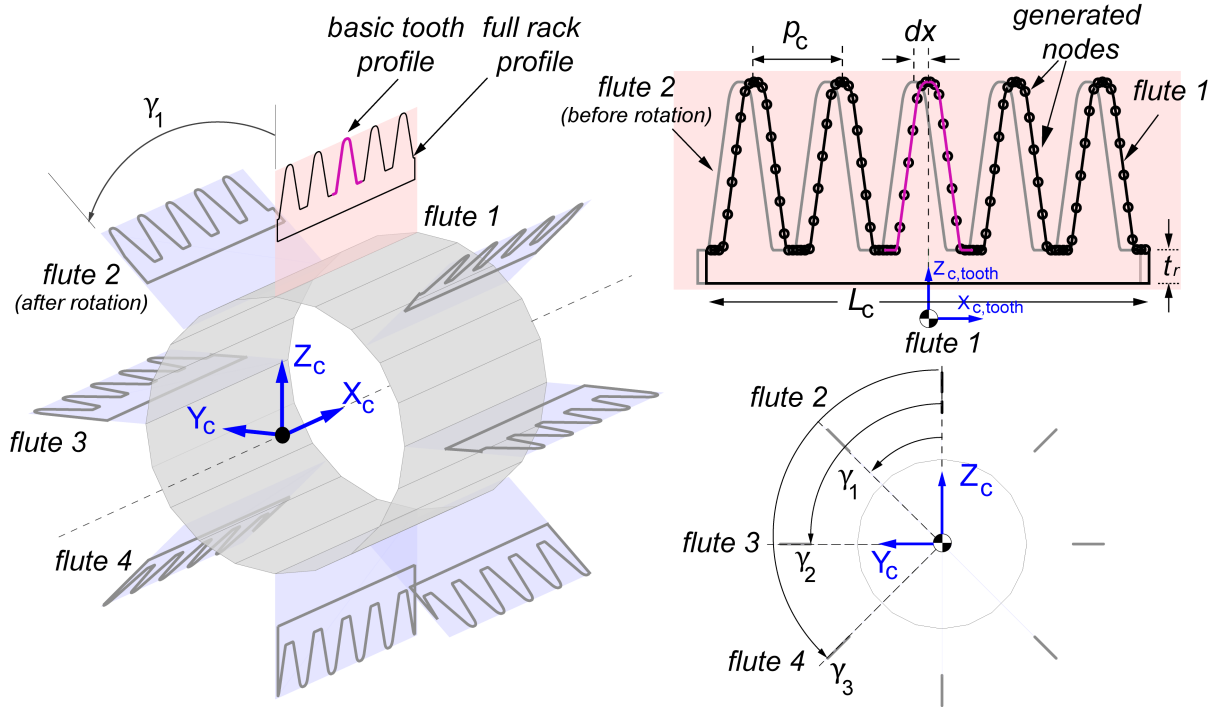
3D hob geometry for a single start hob with 8 flutes
